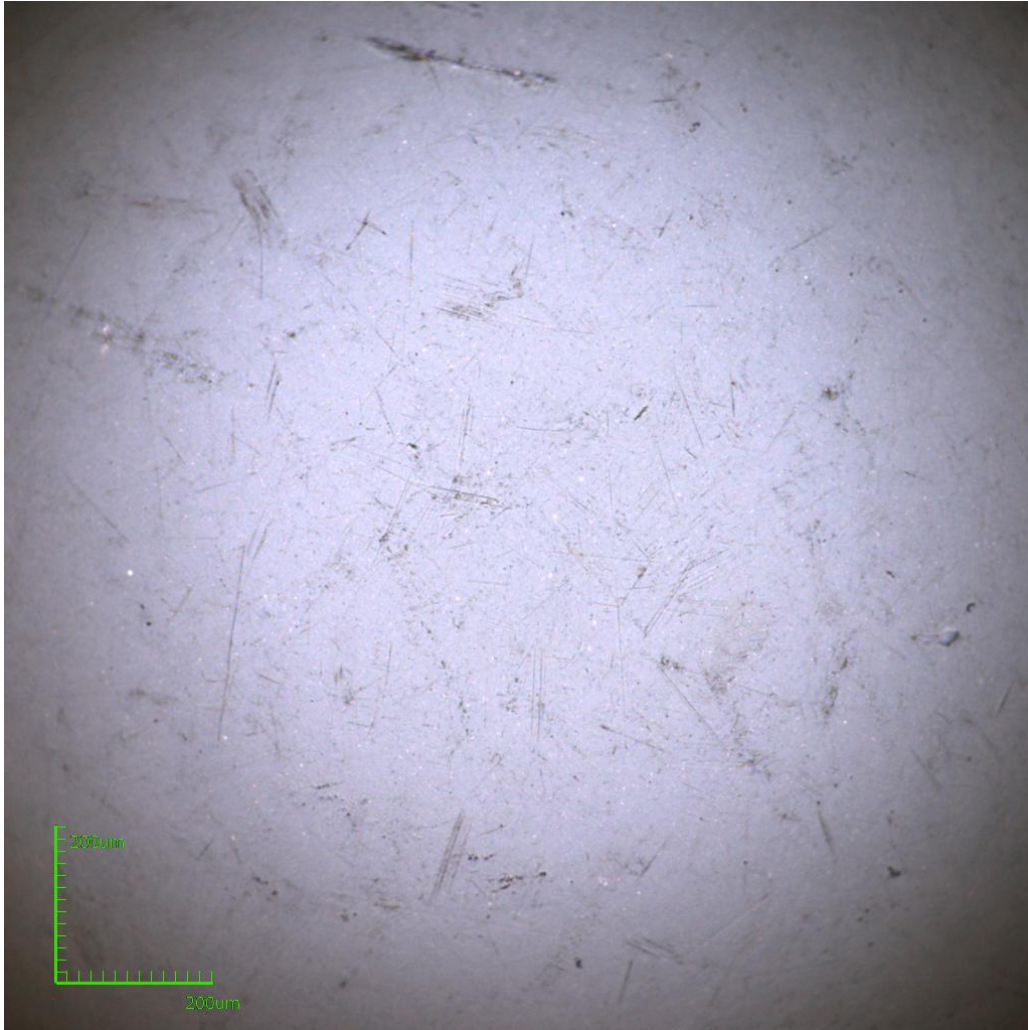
Ball surface ground by the eccentric grinding machine
